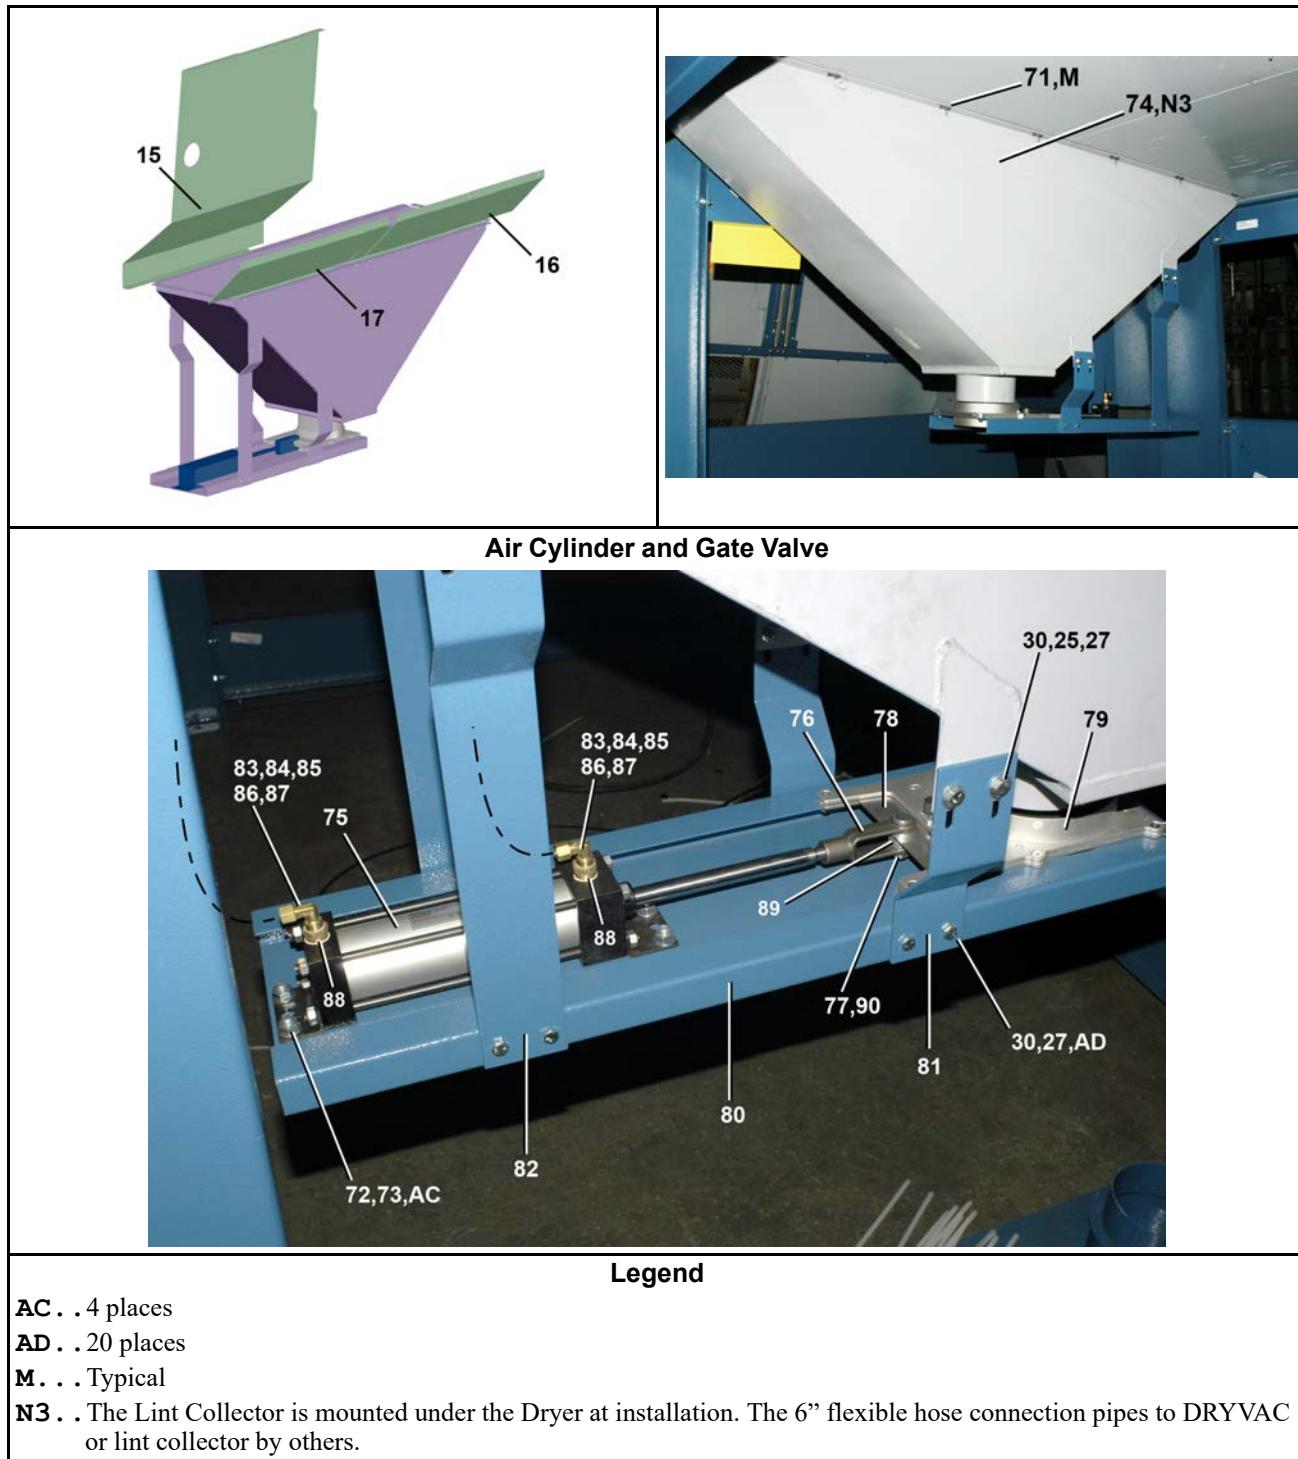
Air Blade Valve Assembly and Lint Collector Pilots
